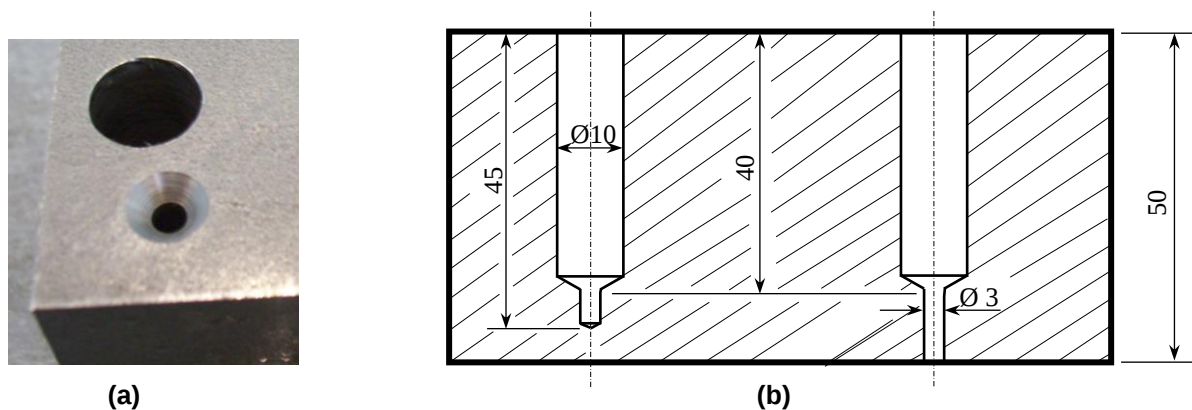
(a) Holes machined in the workpiece (with the 10 mm diameter drill and with the center and 3 mm diameter drills); (b) Cross section of the workpiece showing the two types of holes machined (blind and through holes)
